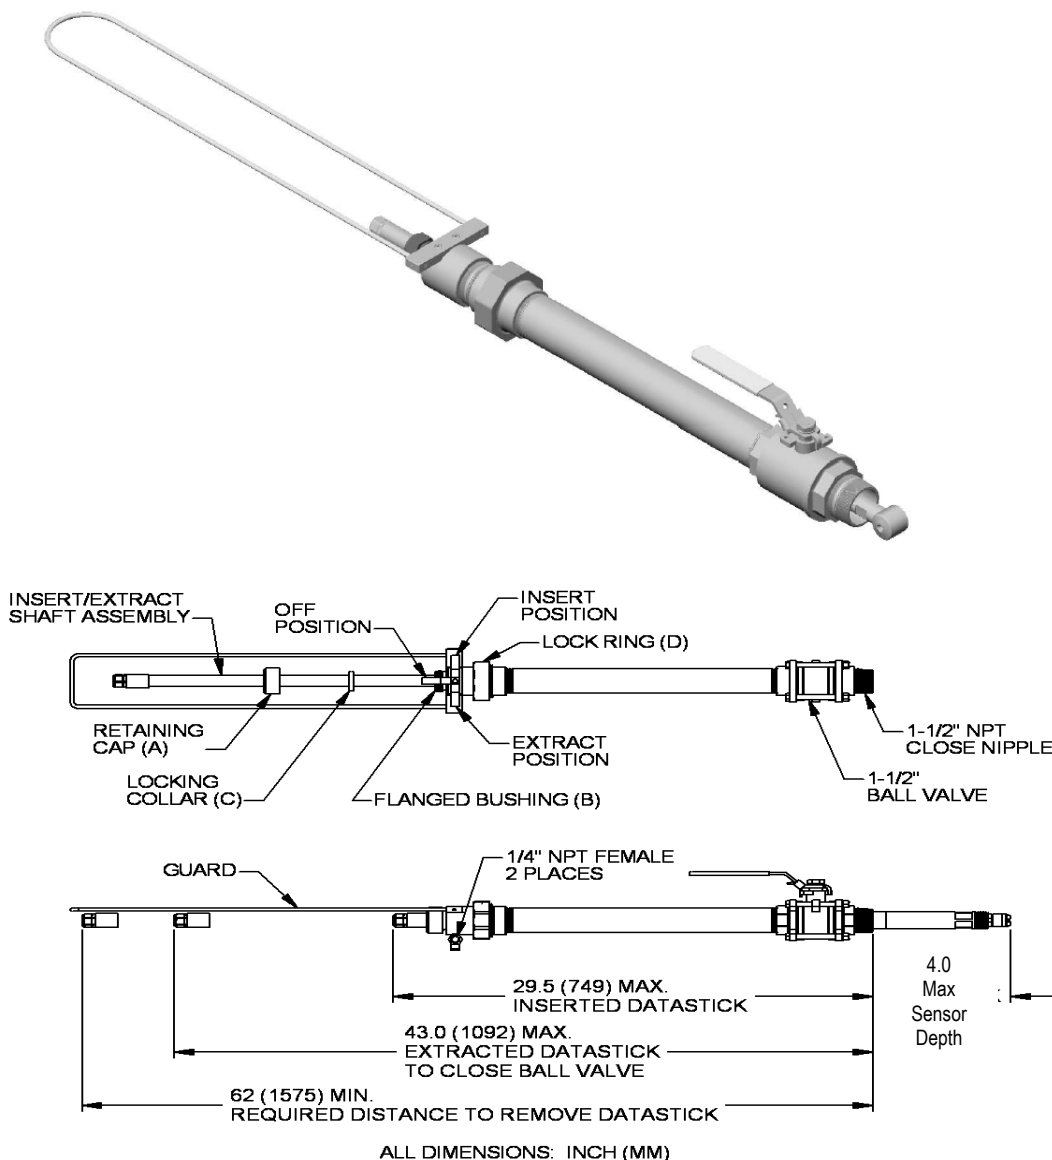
Ball Valve Assembly with Sensor Retracted and Inserted
